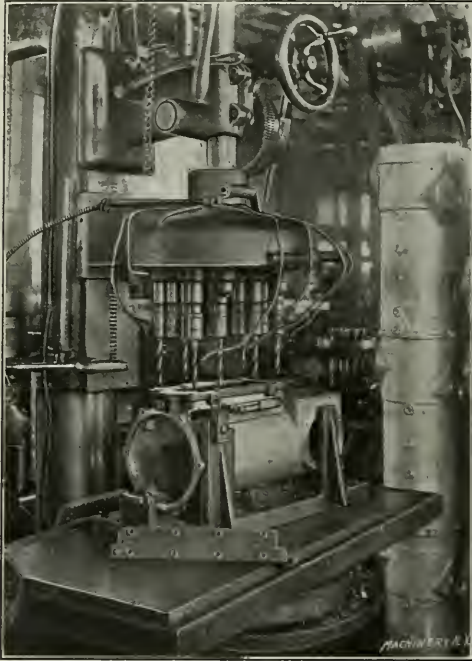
A Multiple Spindle Drilling Head arranged for Two Lay-outs.
